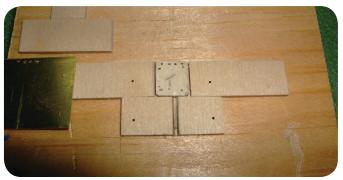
The seat blank exposed after the drilling completed and the brass plate removed.
